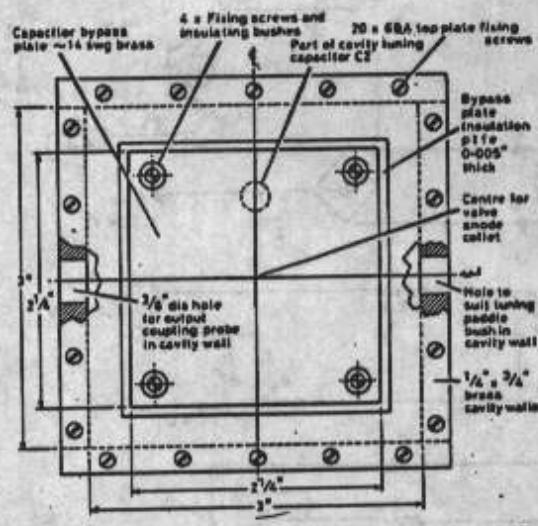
Top view of anode cavity assembly. The cavity top-plate has a 1.25in diameter hole in the centre, to clear the valve anode sleeve
